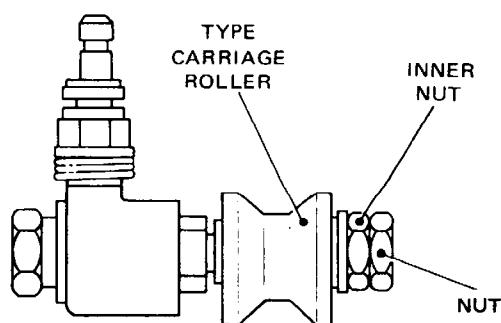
LEFT-HAND TYPE CARRIAGE ROLLER ASSEMBLY
